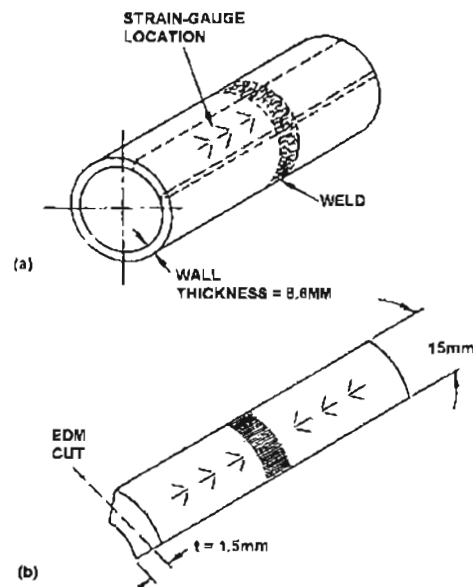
Layer removal technique for bulk residual stress measurements. (a) Isometric sketch of a typical section to be instrumented and removed; (b) division of the removed section into two pieces by EDM technique. (Ellingson and Shack, 1979)
